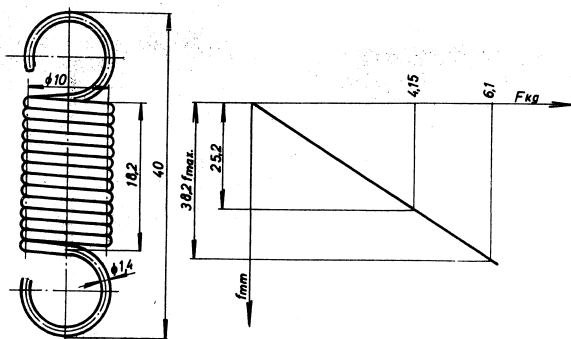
AUXILIARY TRIGGER LEVER SPRING
